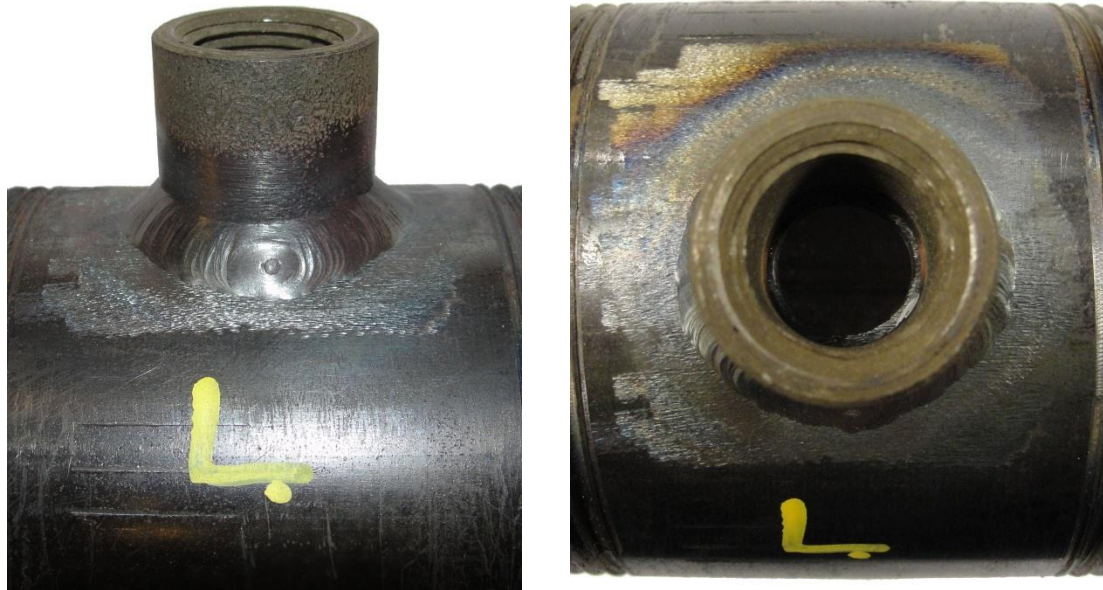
3/4" NPT Half Coupling Welded to Pipe with 13/16" Hole Drilled Through Center
